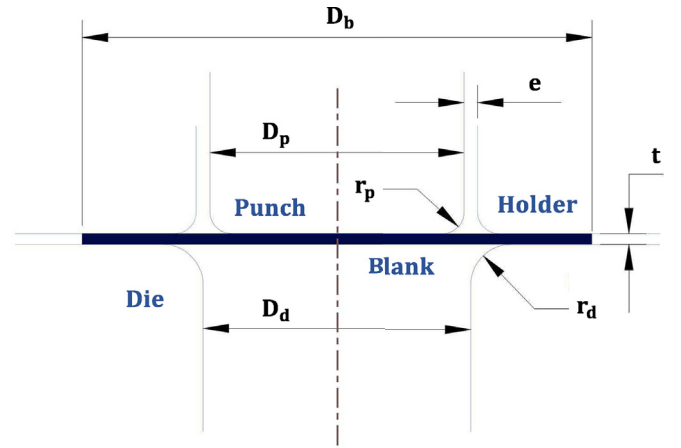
Tools and blank geometries for cylindrical cup deep drawing. This figure is adapted from Yoon et al. [39,46].
